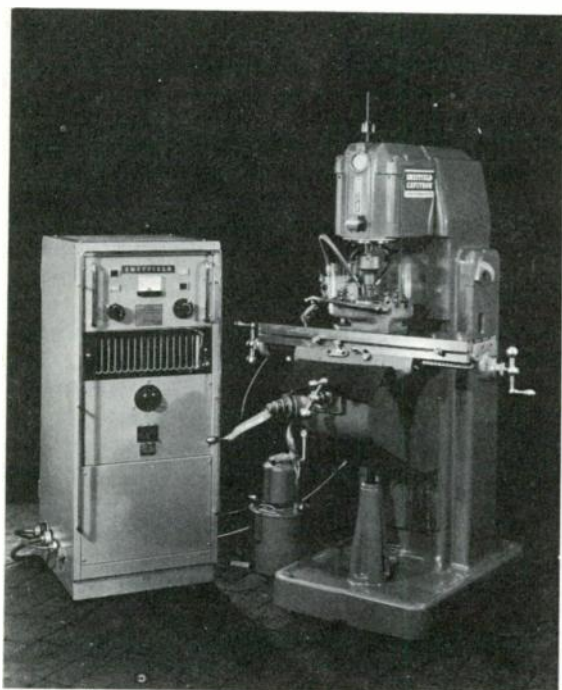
Typical electronic generator with ultrasonic machine tool. Electrical output of generator (controllable) is to coil winding of transducer. Toolholder with cutting tool shown fastened to output end of transducer. Down feed of tool controlled by slide in head of machine. Pump and feed lines delivery abrasive slurry to work in table mounted chuck.
